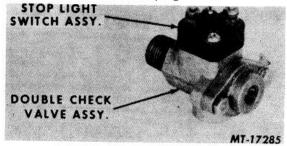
Stop Light Switch Mounted On A Double Check Valve
